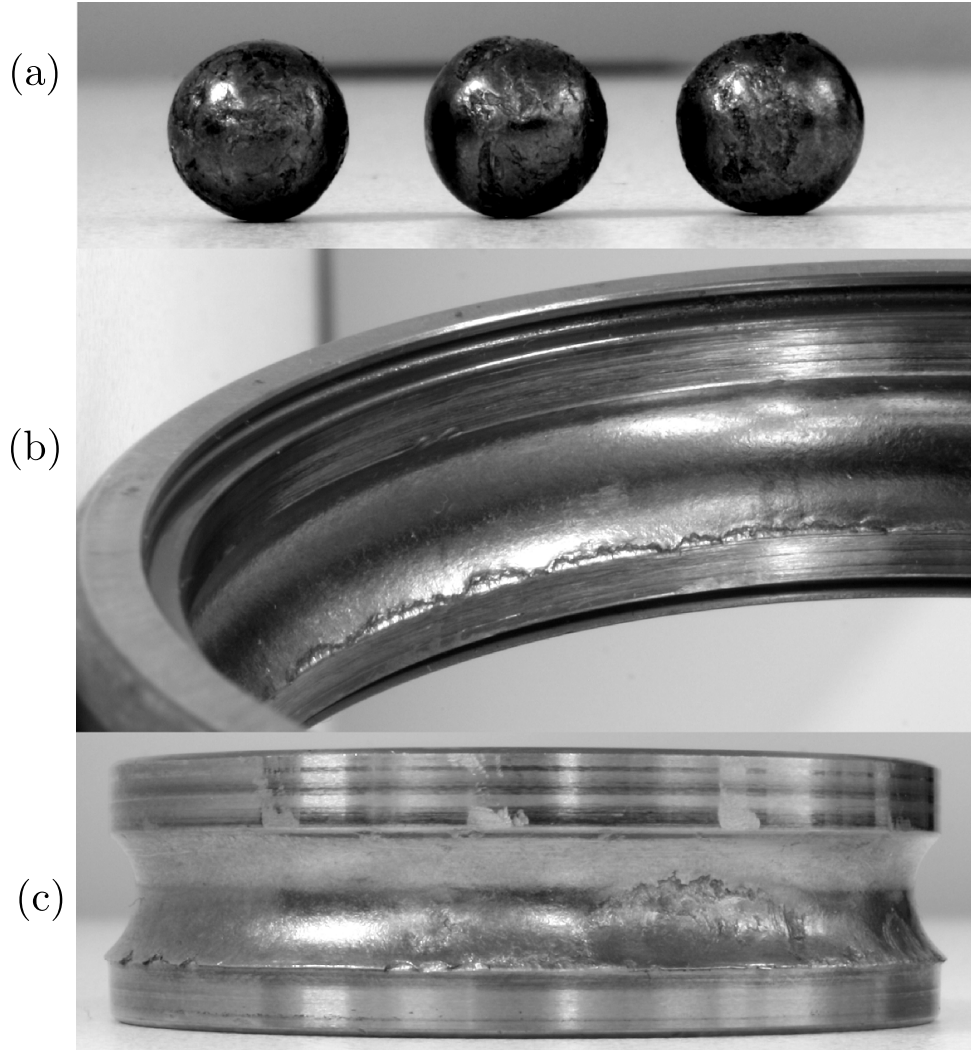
The damaged components in the disassembled bearing. (a) Three damaged rollers. (b) Damaged area on the outer-race. (c) Large damaged area on the inner-race.
